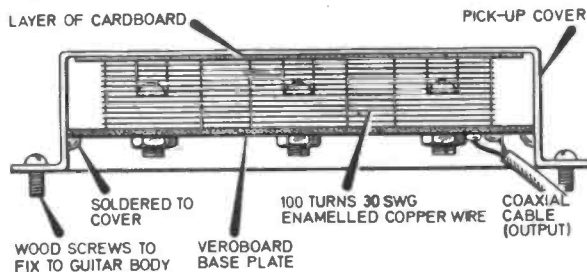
(left). Details of assembling the pick-up coil into its metallic case. Note the cardboard layer between magnets and cover.
